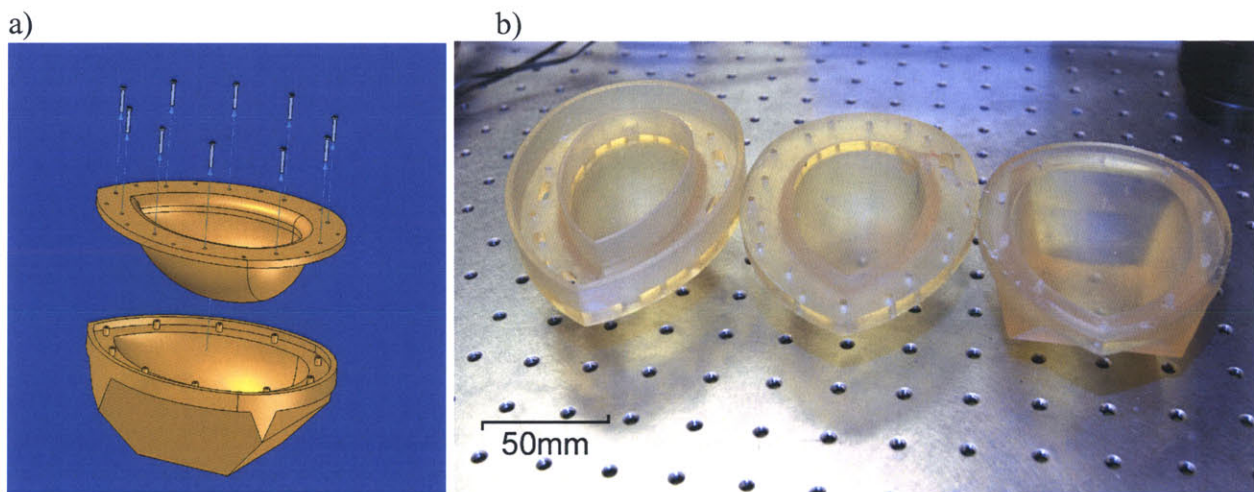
a) CAD assembly of the half ellipse mold Version 1. b) Photo of the SLA manufactured mold pieces.
